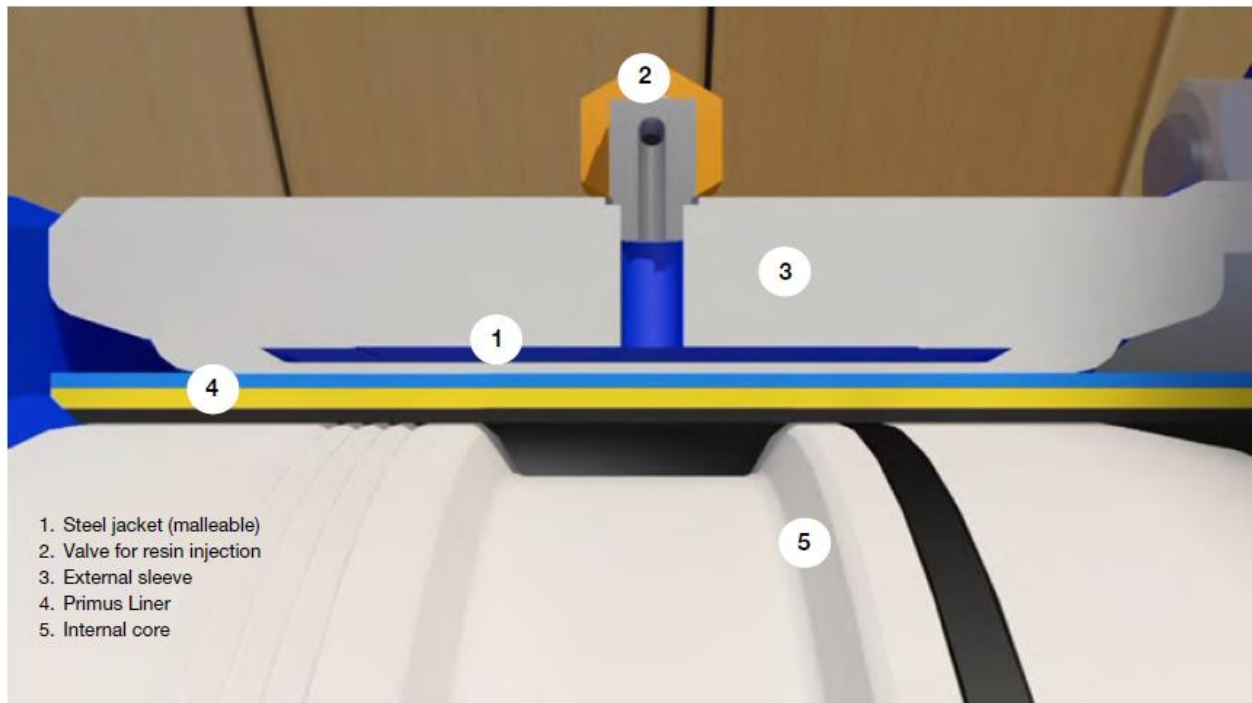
Exploded and general assembly drawing of the low pressure connector
